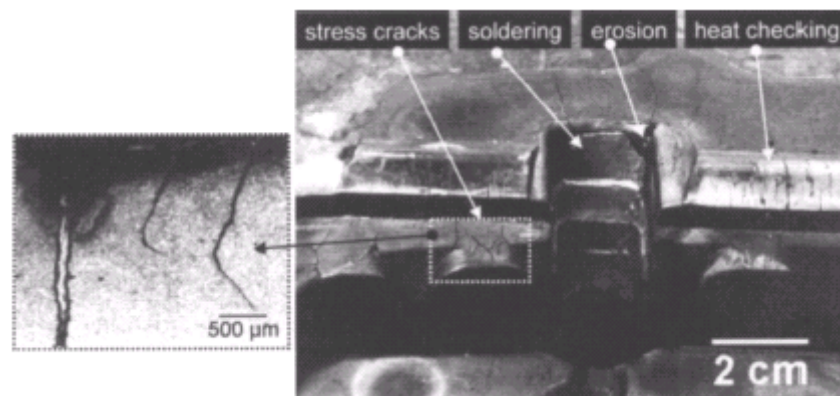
Damage mechanisms in aluminum die casting (the inset on the left shows a scanning electron microscope cross-section of the mould on the right with thermal fatigue cracks) [5].
